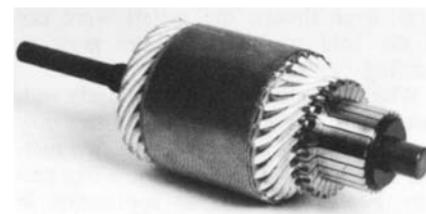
Automotive starter motor armature with ultrasonically welded wires to commutator
